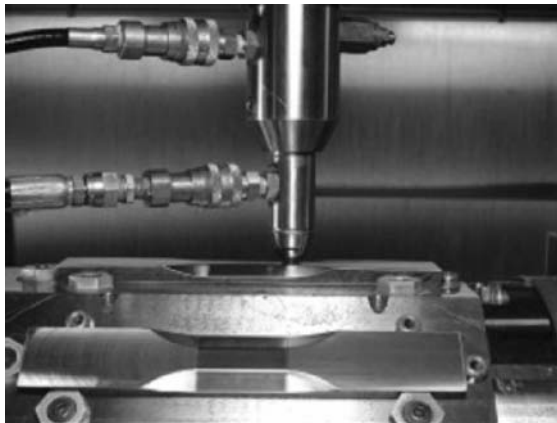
Photo showing fixture and work piece (in this case fatigue specimen) mounted in CNC machine [3.62]
